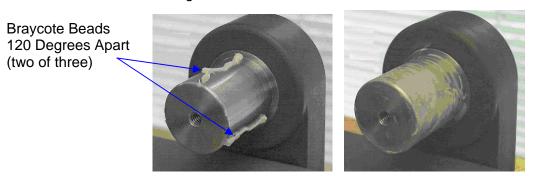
Fwd Frame Assembly Guide Pin with Braycote applied and spread.
